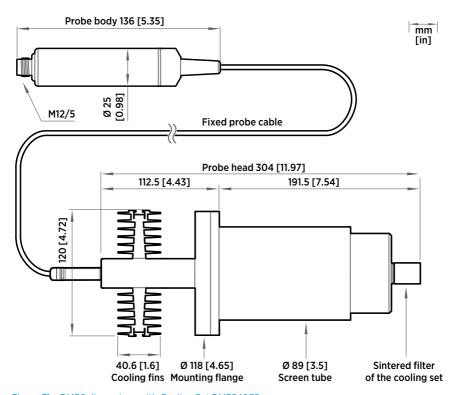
DMP6 dimensions with Cooling Set DMP246CS
